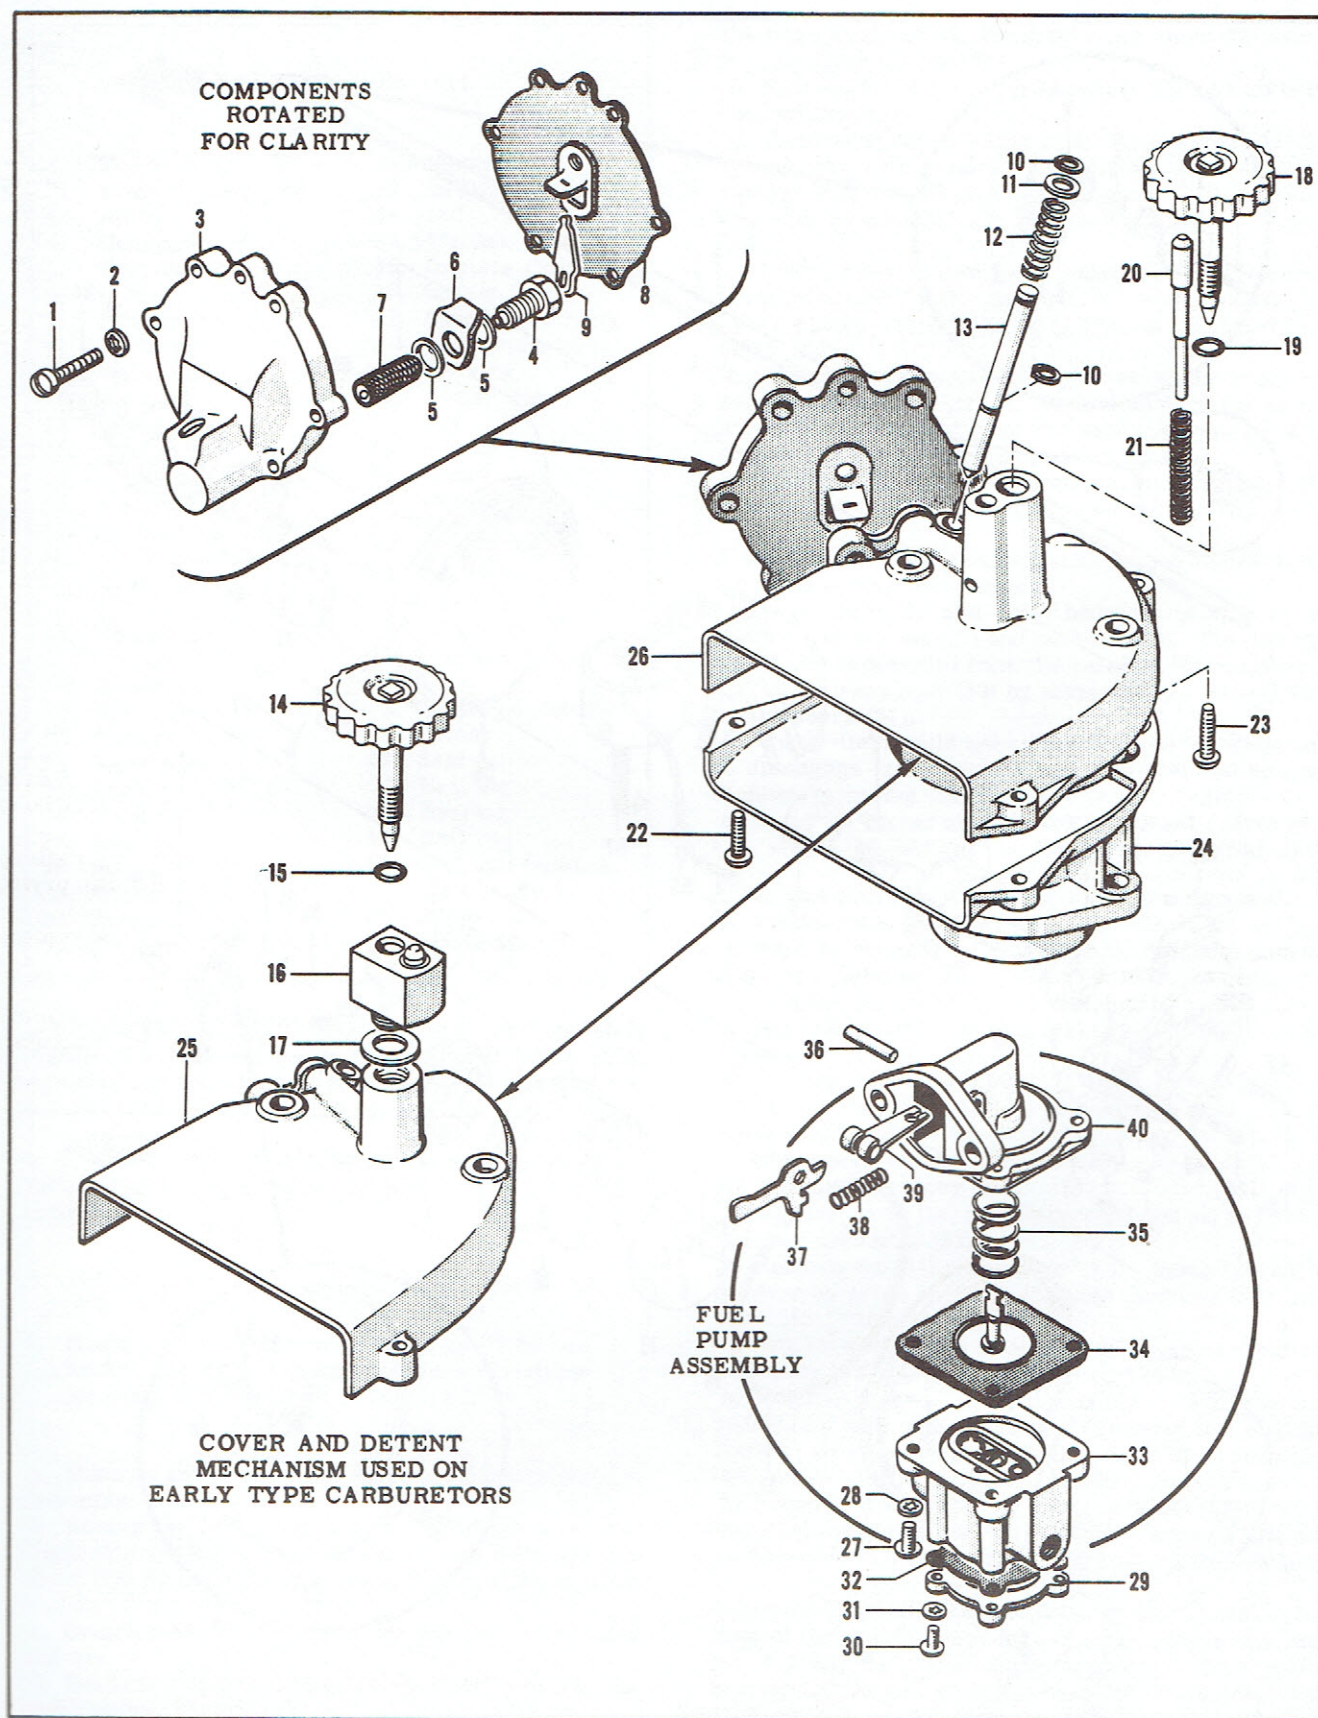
Carburetor and Fuel Pump Assemblies, Exploded View
